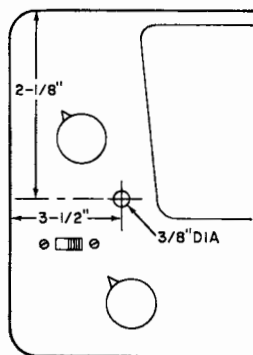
Before drilling R3/R4 mounting hole, check for adequate behind-panel clearance.
